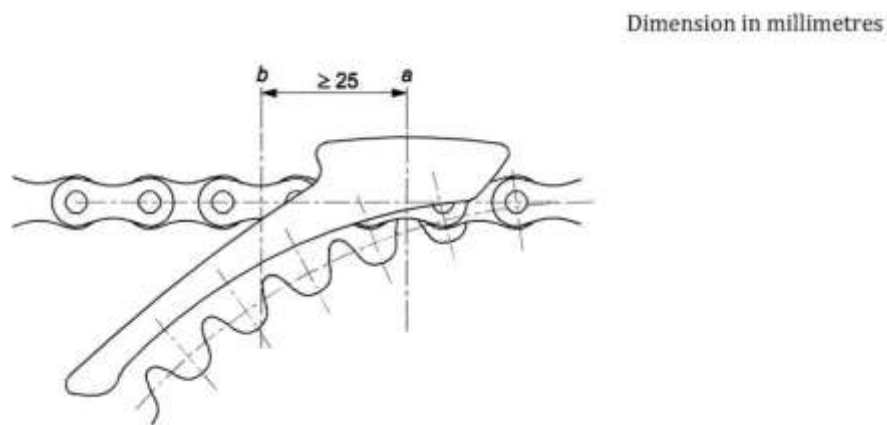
CHAIN AND DRIVE BELT PROTECTIVE DEVICE REQUIREMENTS (MINIMUM)
